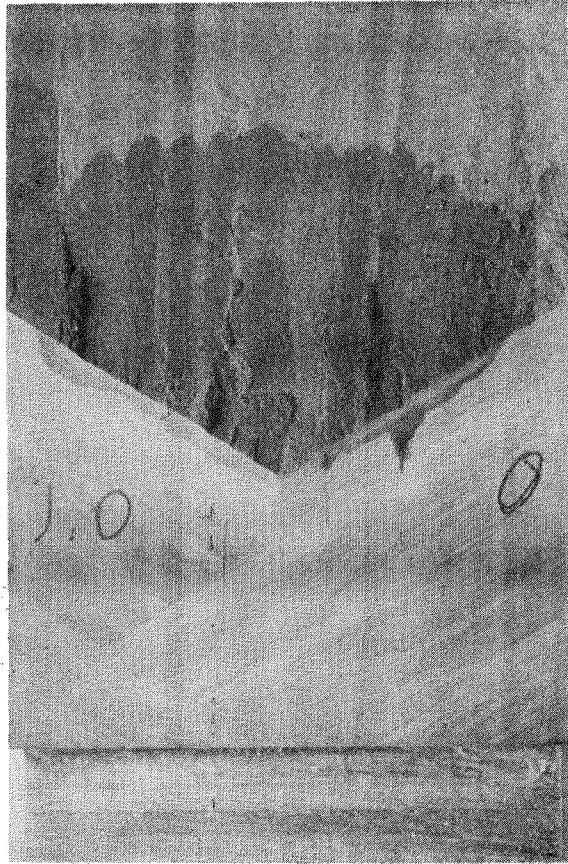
Fatigue crack surface marked with Zygo in divider geometry.
